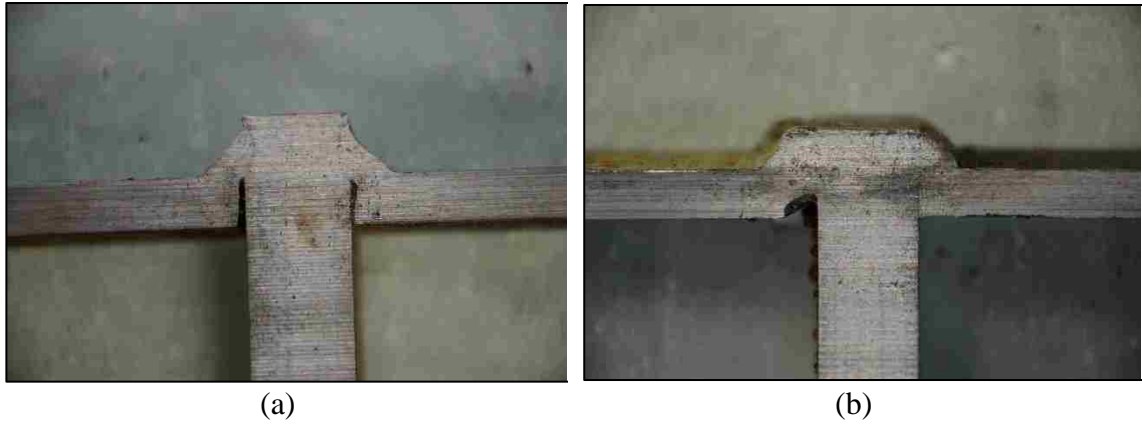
Brace-to-gusset plate fillet weld specimens from tests by Sizemore et al. (2015): (a) with equal gap; (b) with unequal gap
